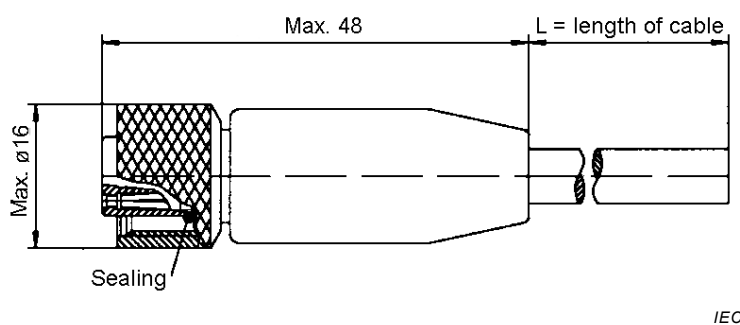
Non-rewireable connector, with female contacts, straight version, with locking nut
